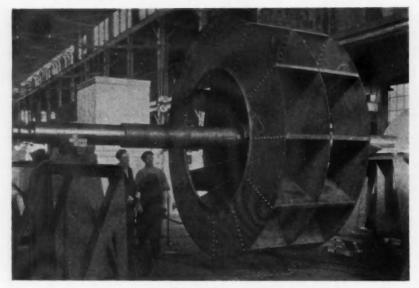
Heavy-duty steel plate fan wheel and shaft
